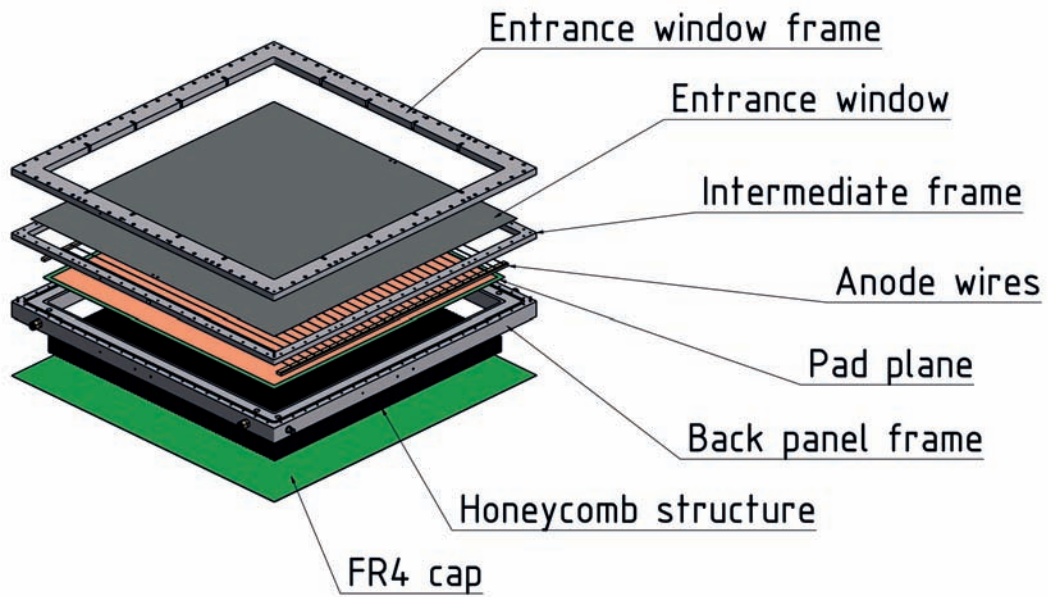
Technical drawing of the full-size generation IV prototype.
